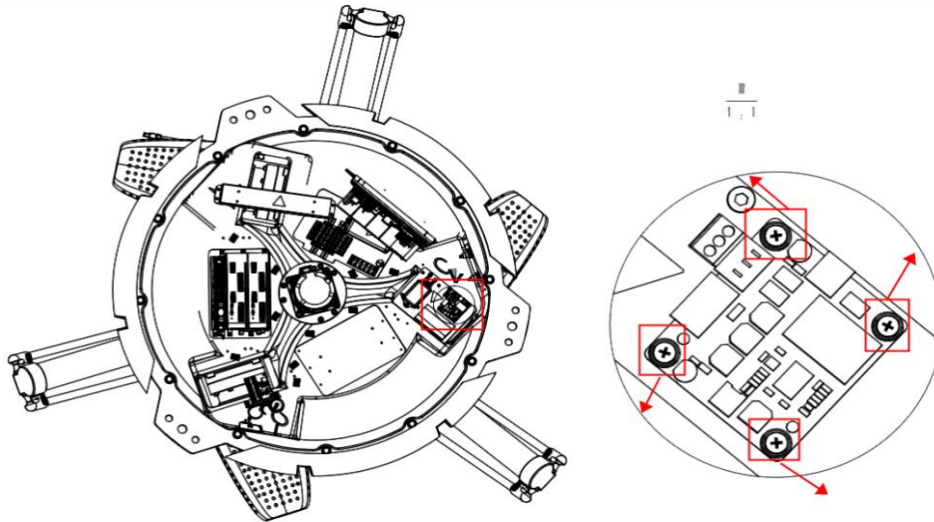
Remove the UPS power supply PCBA fixing screws
